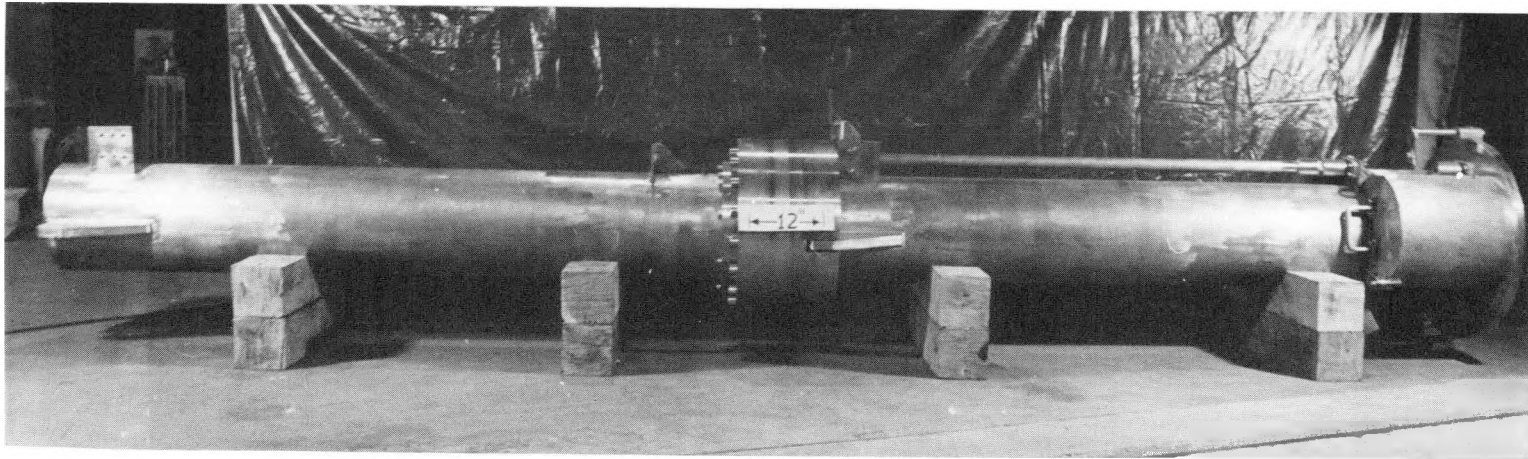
BIF Supply Tube Transfer Container (Shown Horizontally, But Used Vertically)
